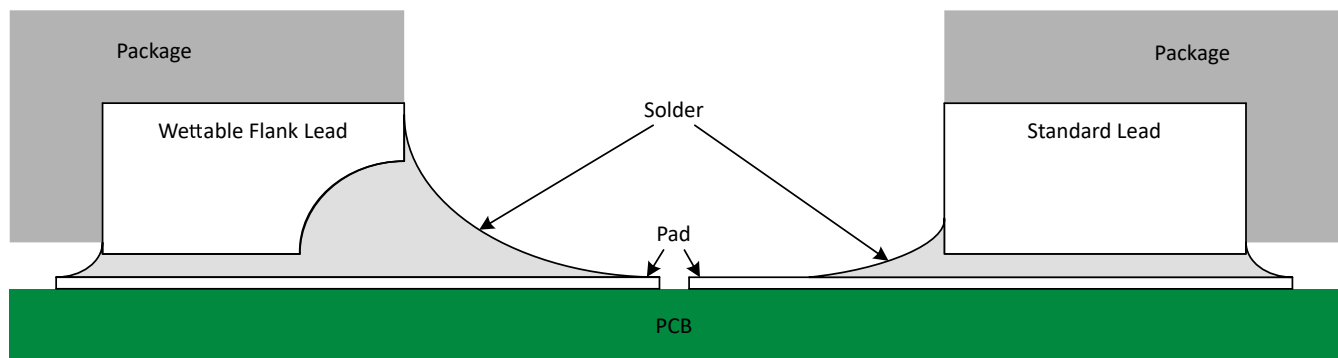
Simplified Cutaway View of Wettable-Flank QFN Package and Standard QFN Package After Soldering
